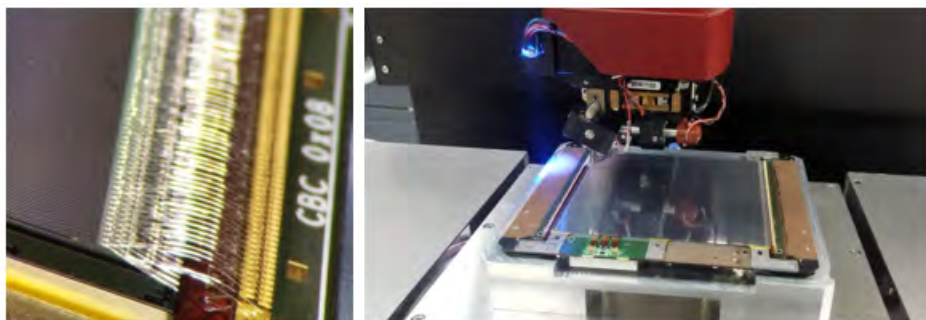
(Left) Wire bonds between sensor and hybrid (Right) module on wire bonding machine.
